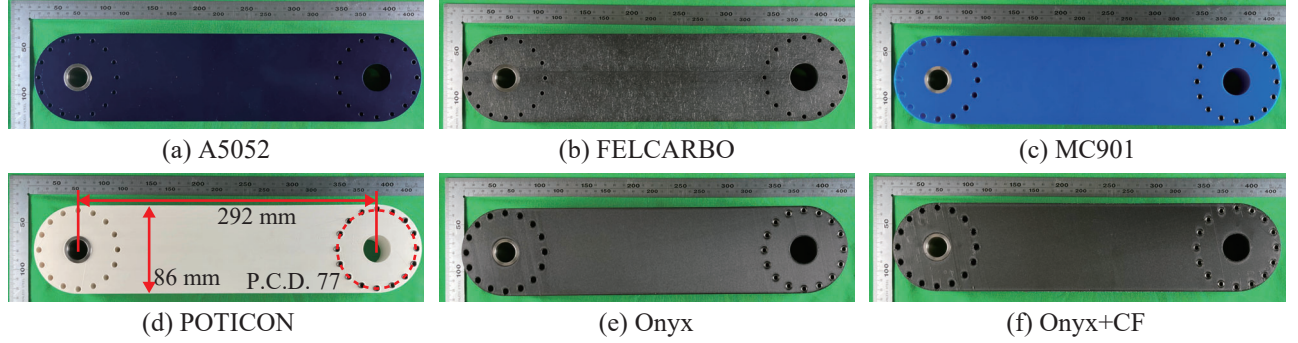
Shape of the specimen. (a) A5052 is the aluminum alloy. (b) FELCARBO and (c) MC901 are resin parts machined from bulk material. (d) Onyx, (e) Onyx + CF, and (f) POTICON are 3D printed parts.
